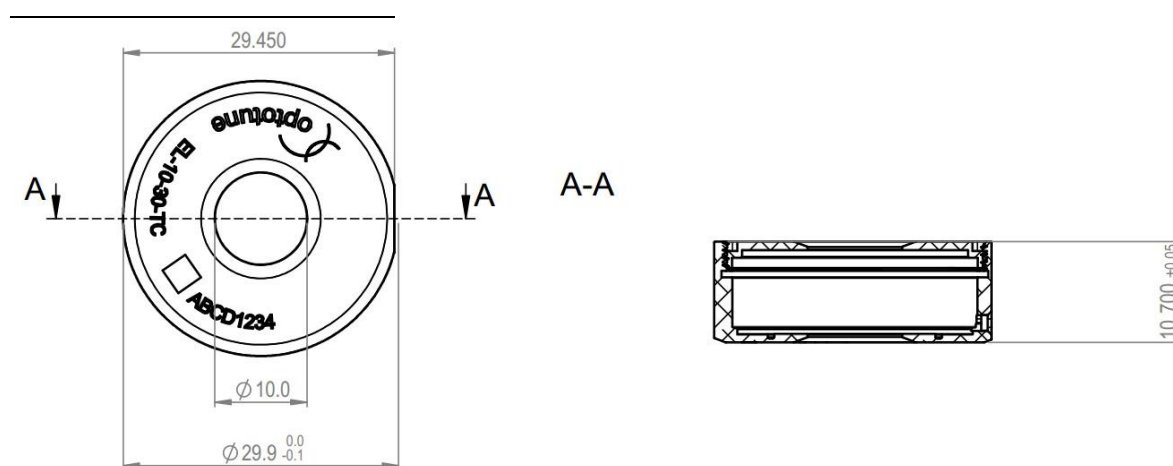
Mechanical drawing of the EL-10-30-TC (unit: mm).
